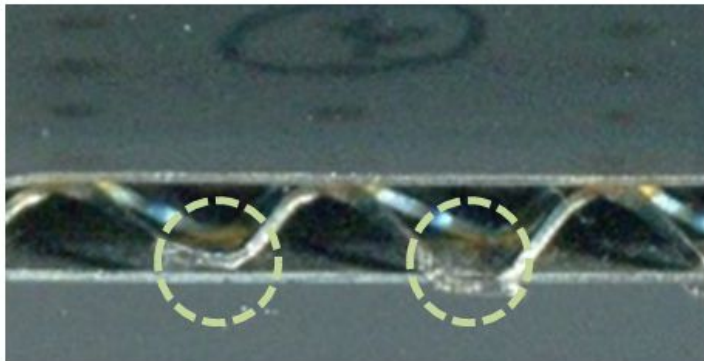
The welding of initial imperfections on the weld zone
